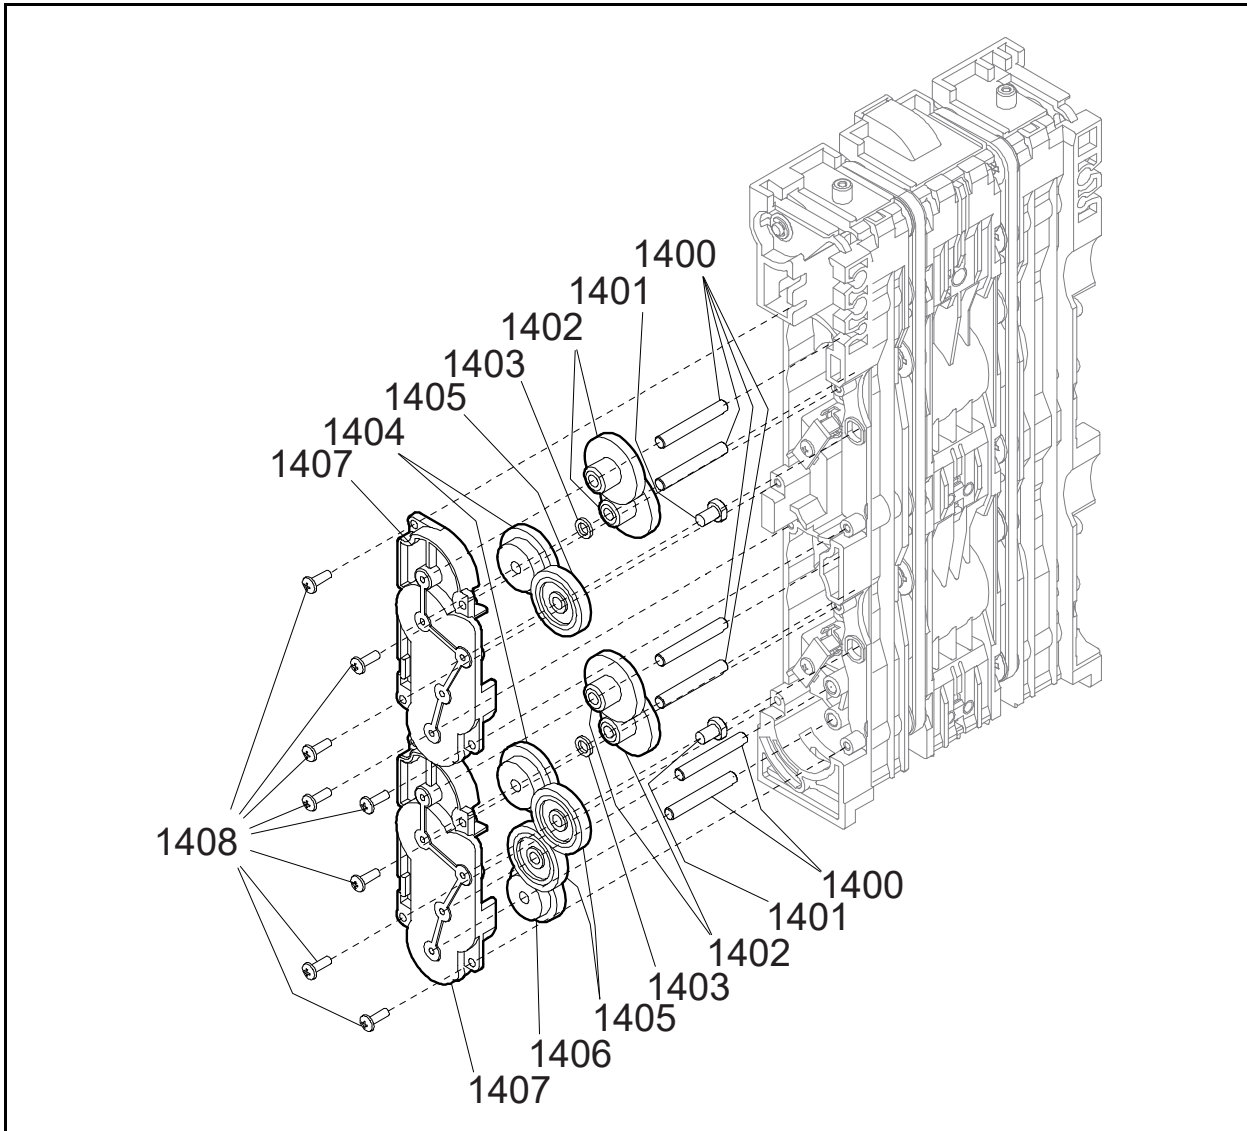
iPRO-RC Rear Transport Assembly 4 Exploded View
